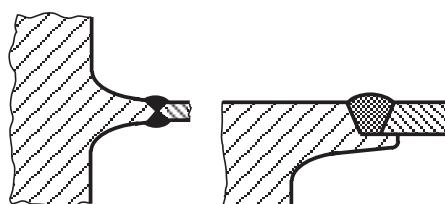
Welding flanges on steel castings or forgings
